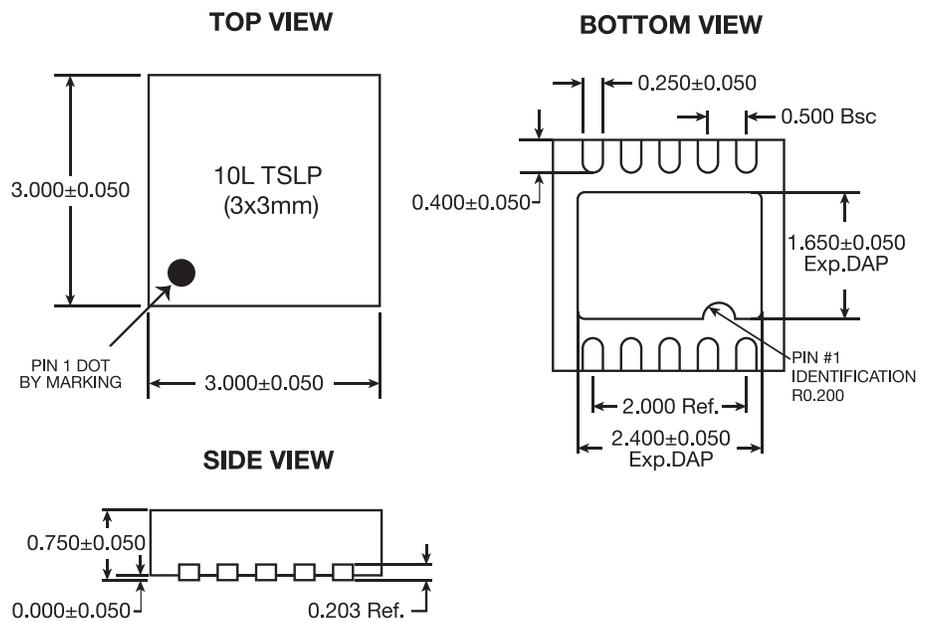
Package drawing of 10-lead, 3mm x 3mm DFN
